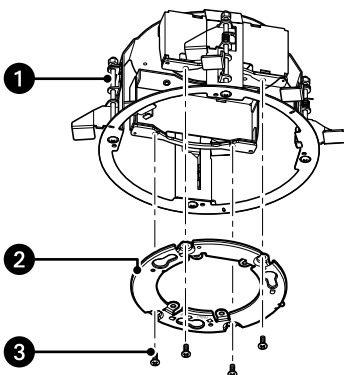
Attaching the Camera Attachment to the Camera Mount Bracket
